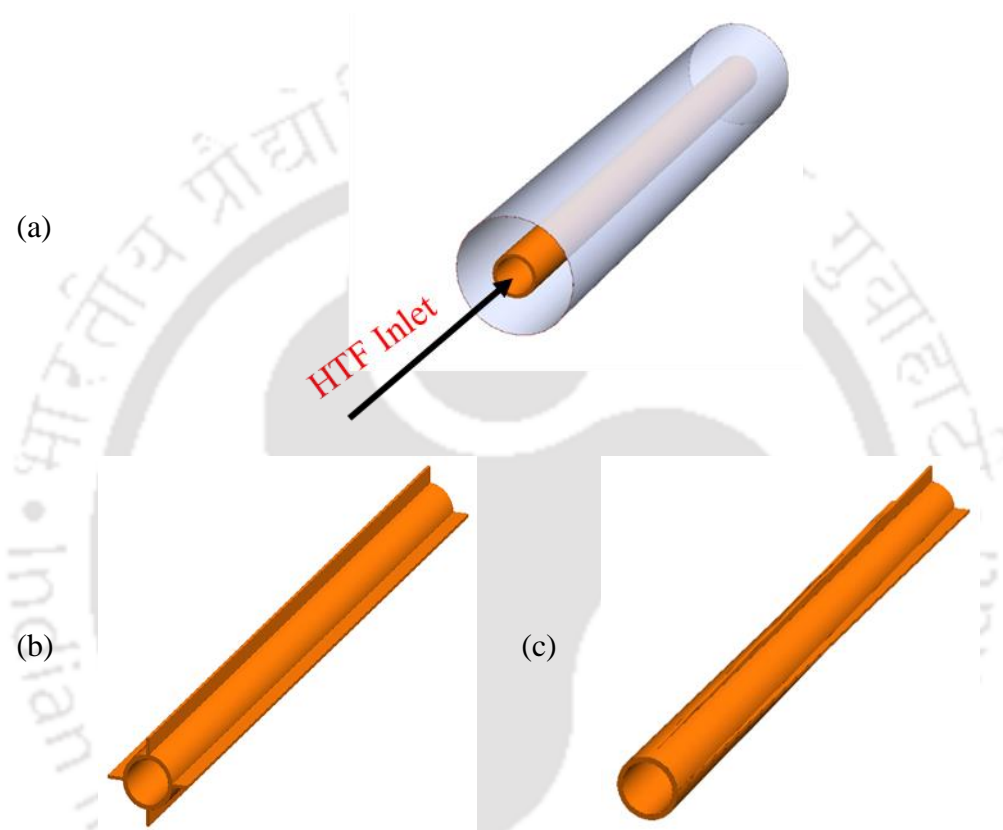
Schematic of (a) tube-in-tube LHS module (b) inner tube with standard fin and (c) inner tube with novel fin.
